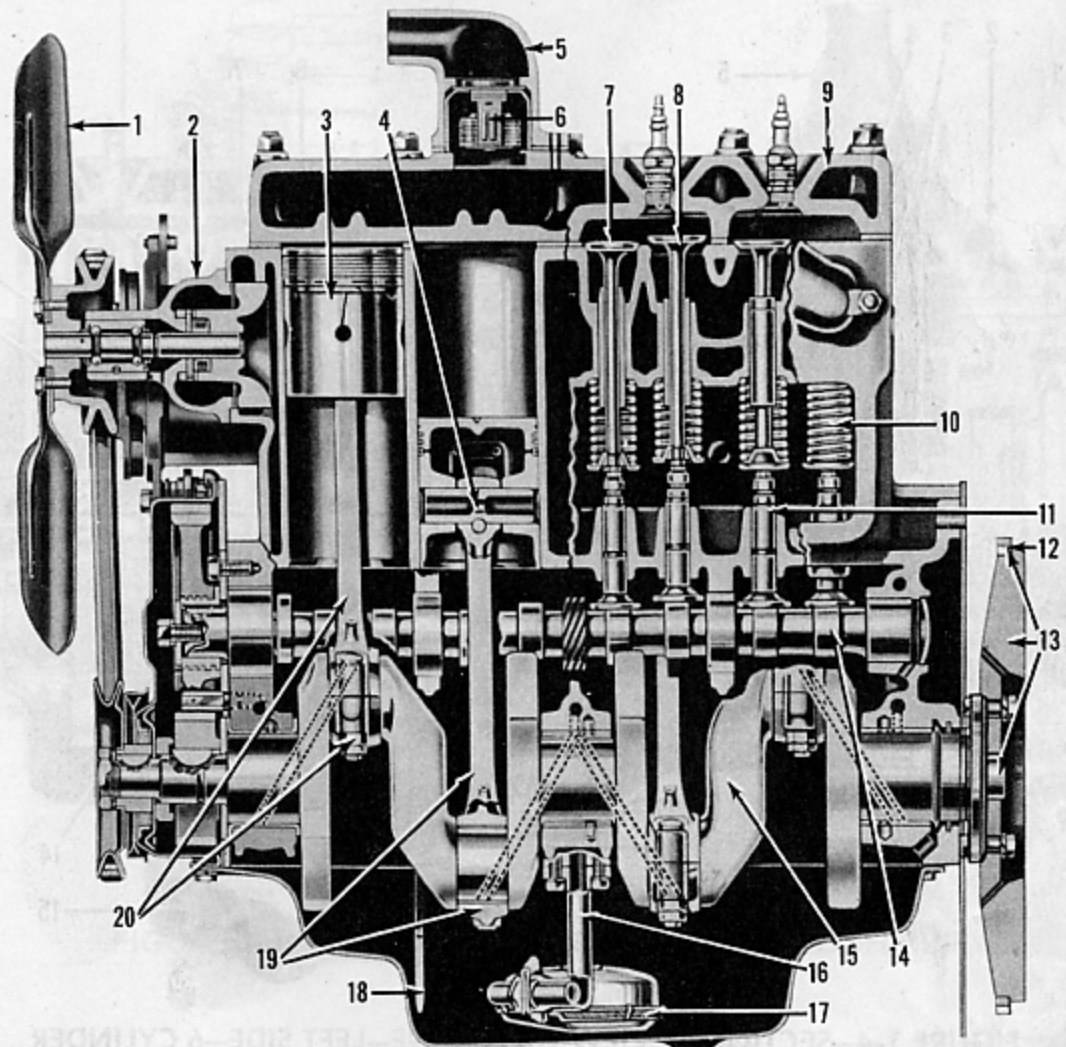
SECTIONAL VIEW OF ENGINE—LEFT SIDE—4 CYLINDER
